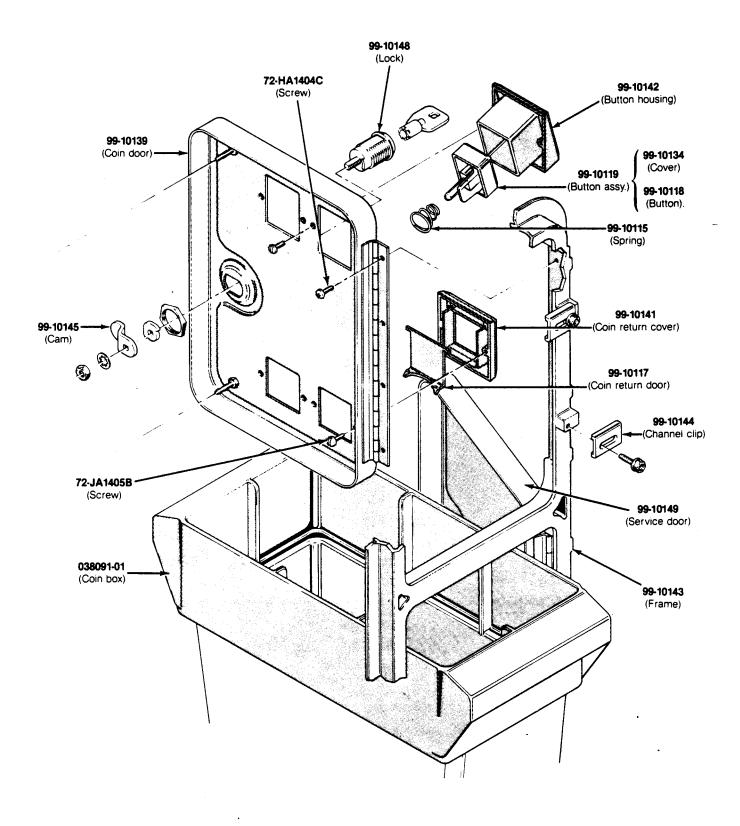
American-Made Coin Door Assembly, continued 171027-001 A
